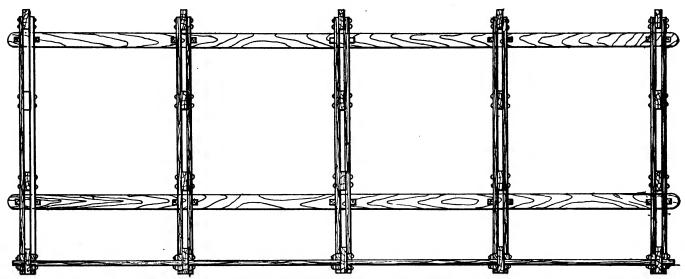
A SIDE ELEVATION OF THE HANDY STOCK AND MATERIAL RACK
